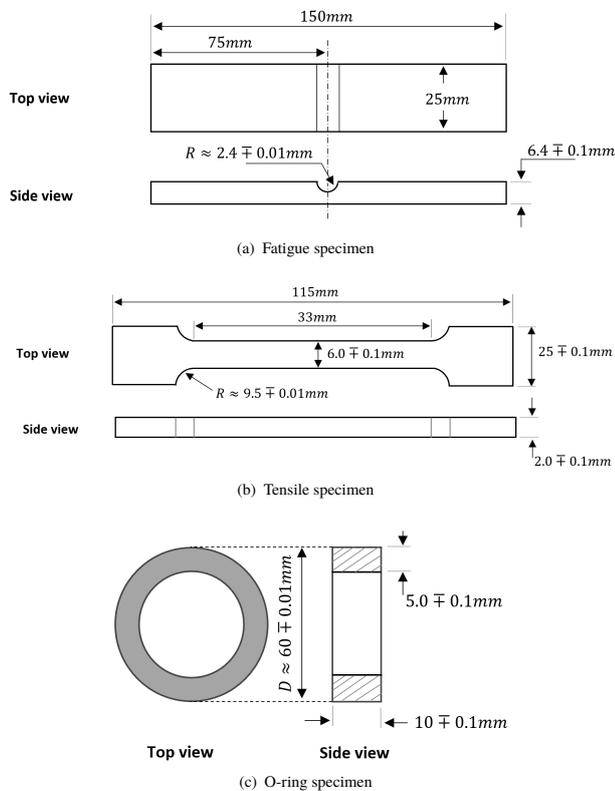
Schematic of the specimens used in this test where (a) The fatigue test specimen, (b) The tensile test specimen, and (c) the O-ring modulus specimen.
